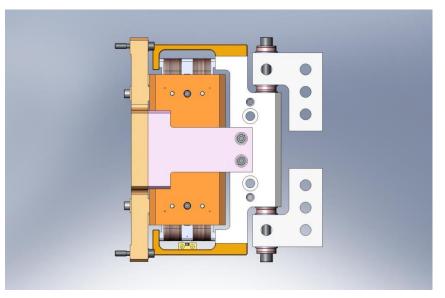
Horizontal Actuator, ready for installation in HAM ISI.
